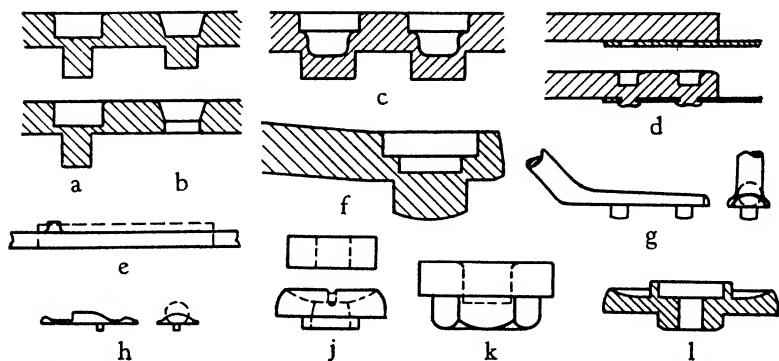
Cross-sections to scale, of parts shown in Fig. 201, showing metal displacement to form rivet lugs.
